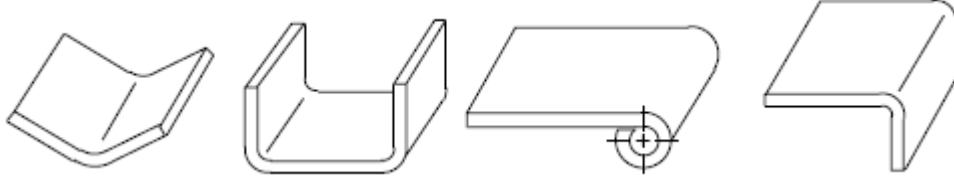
Examples of parts obtained using sheet metal bending [27]
